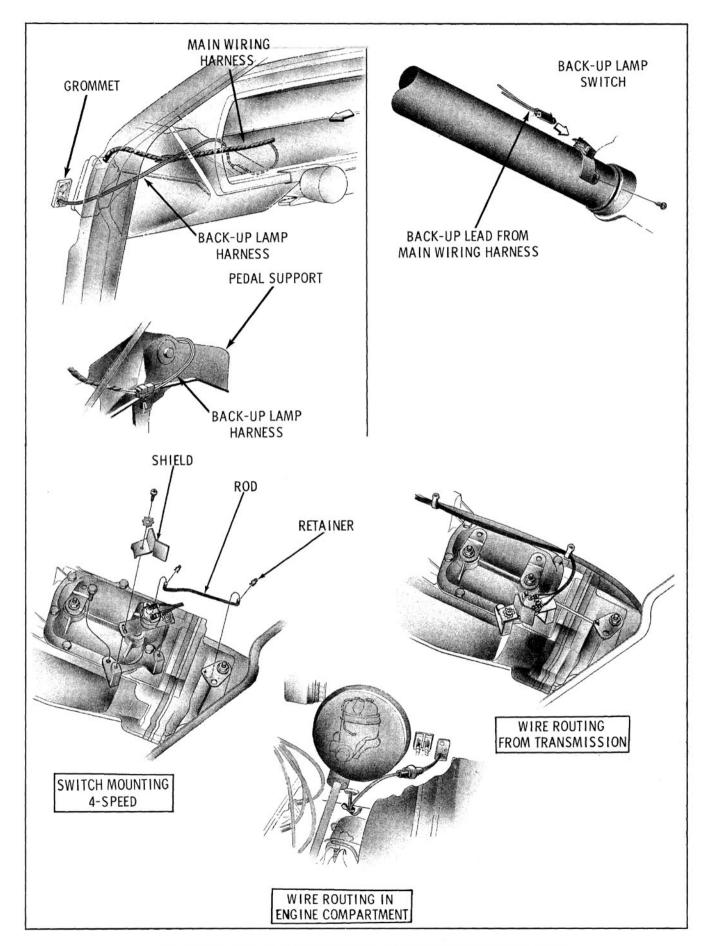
Back-Up Lamp Wiring and Switches (Floor and Column Shift)
